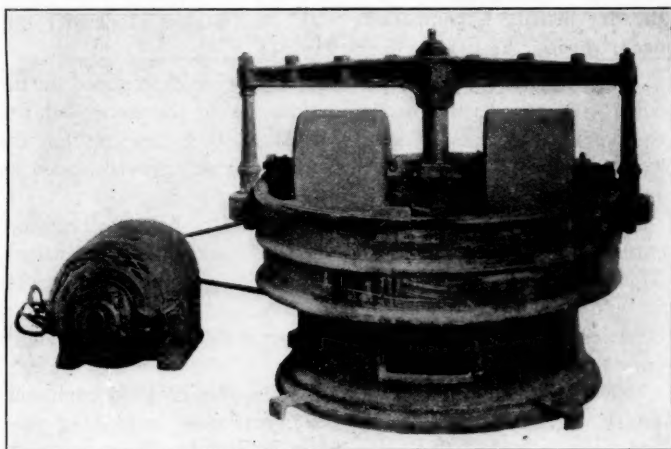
PHOTOGRAPH. SAND-MIXING MILL
